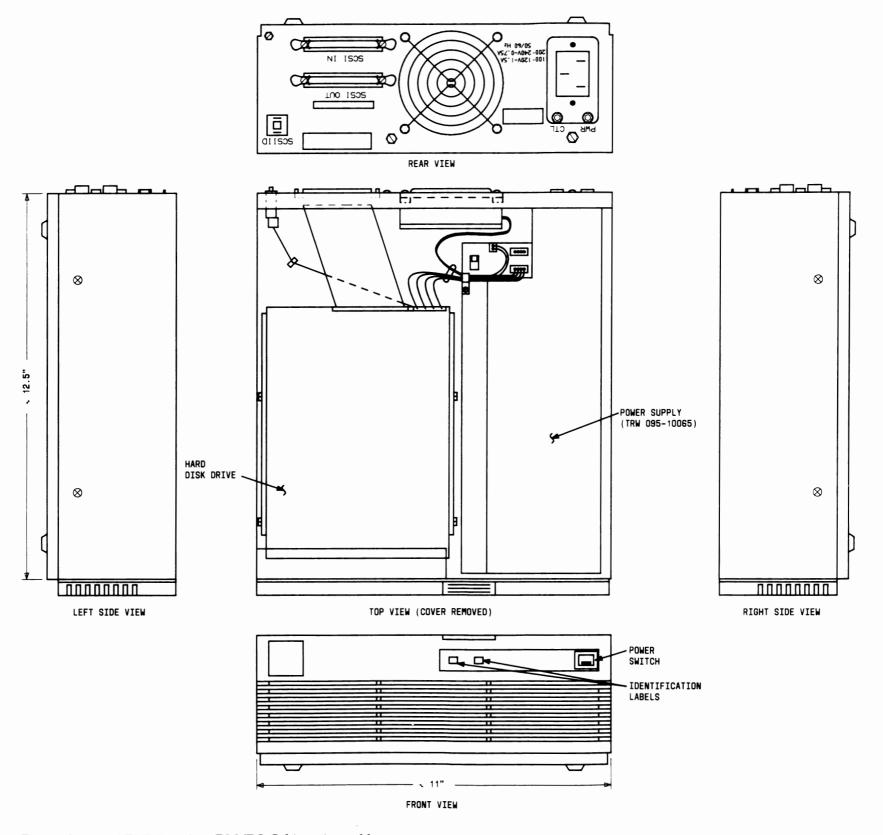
AT&T DM/S or DM/DS Cabinet Assembly Drawing (ED-3T011-30,G8,G9,G11)
